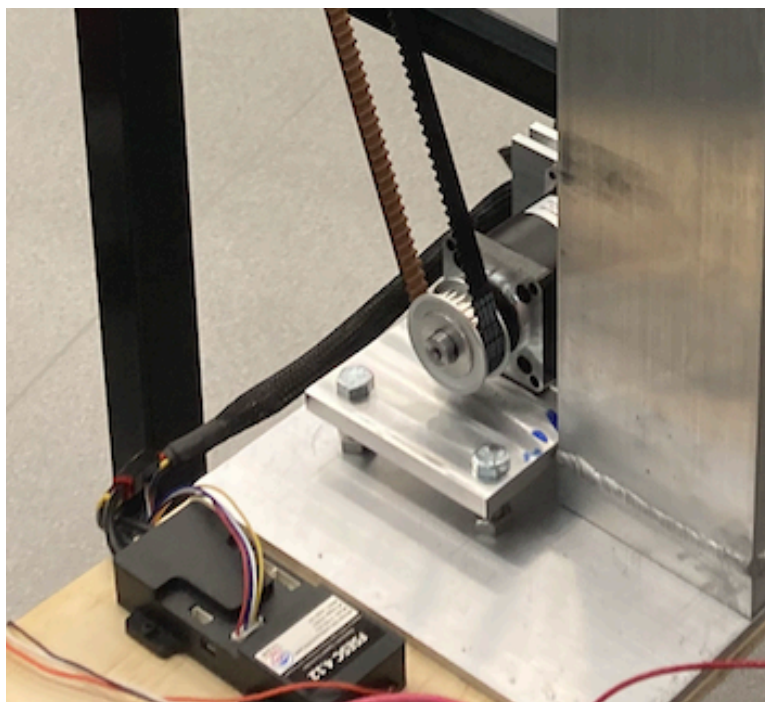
A hole is centered at the end of the gearbox's shaft.
